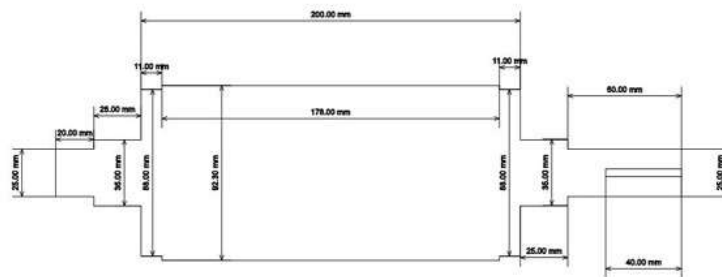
Dimensional Drawing of Ultrasonic Roller (CAD Model)
